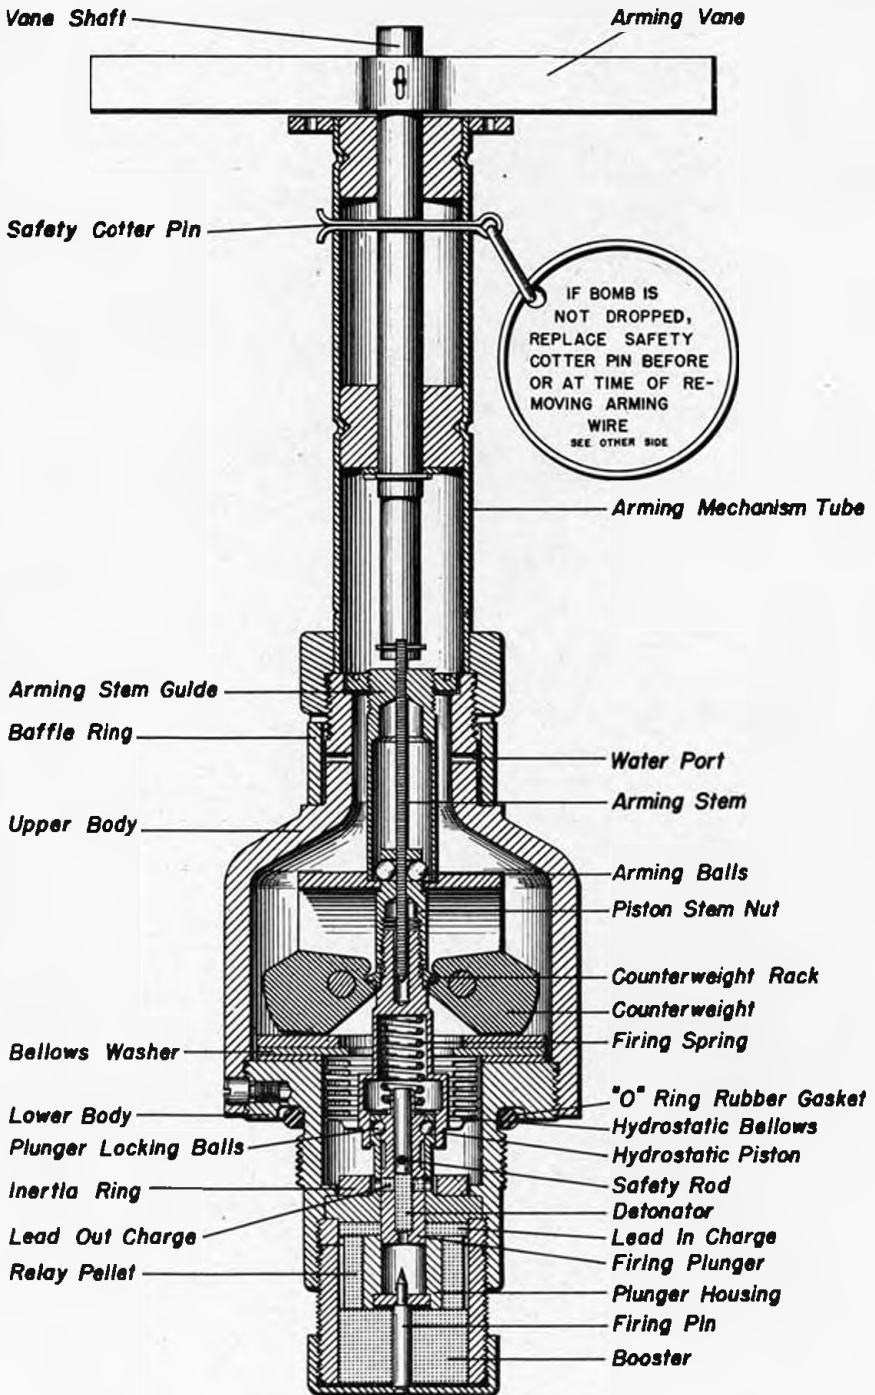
Tail Fuze Mk 231-O, Sectional View
